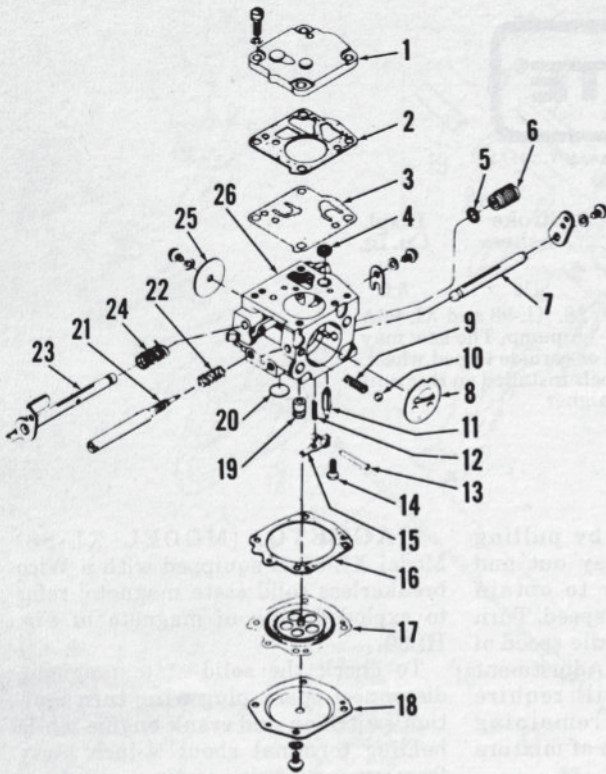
Exploded view of Tillotson model HS carburetor used on model XL-98A. Note governor valve (6). There is no high speed mixture needle on this carburetor.
